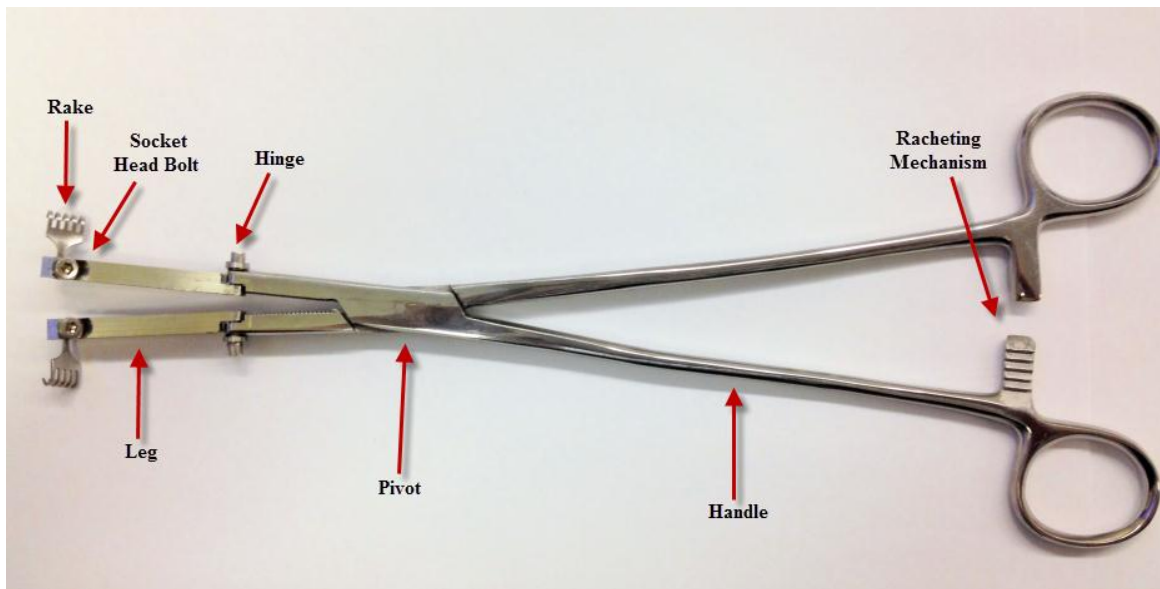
Machined final prototype shown in straightened position. Note that the locking collars are not present.
